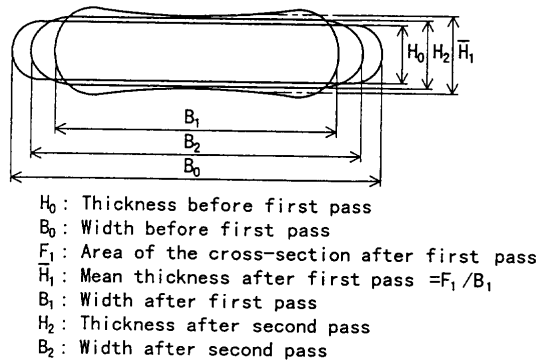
Symbols used in this paper illustrated in the cross-section.
